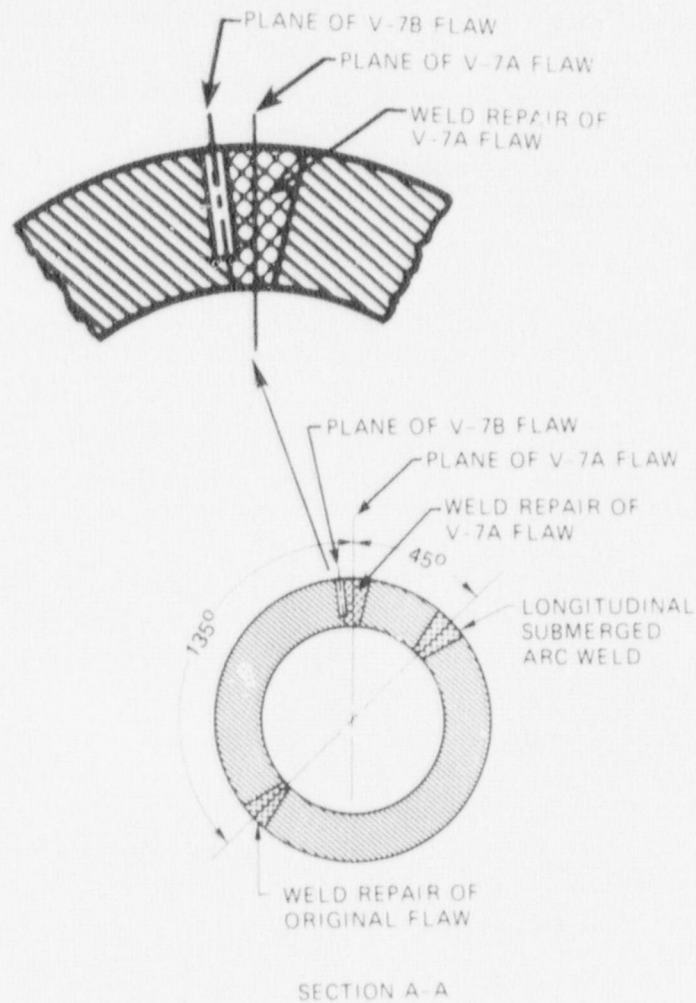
Relative locations of the flaws and weld zones in vessel V-7.
